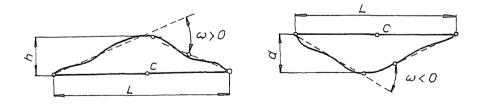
a) hump, b) hollow; C — midpoint of gauge length (weld), L — gauge length
